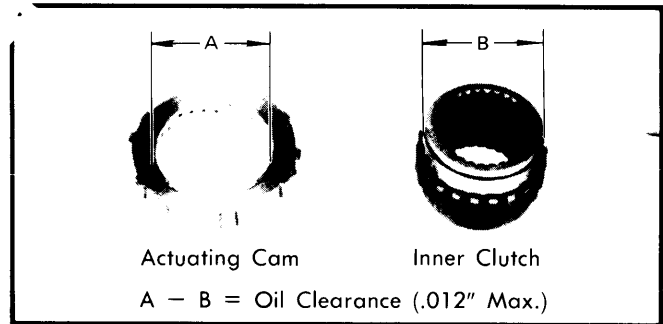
Measuring Toyota Inner Clutch Oil Clearance
